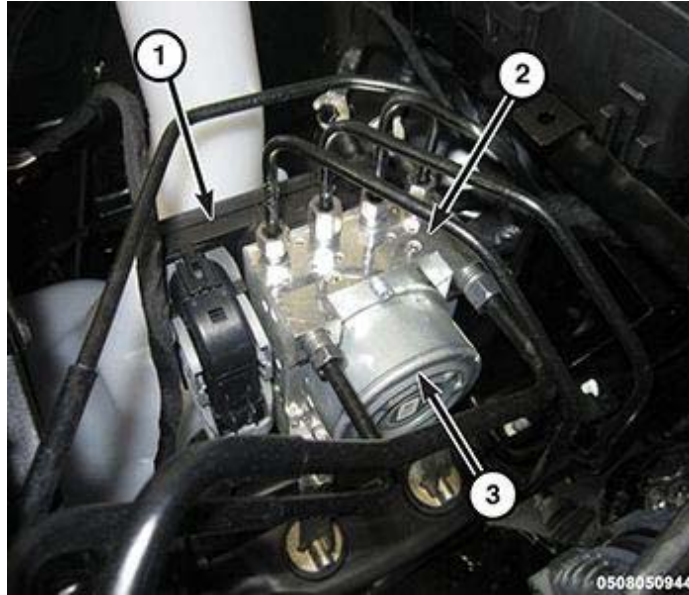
Antilock Brake Module (ABM) & Hydraulic Control Unit (HCU)
